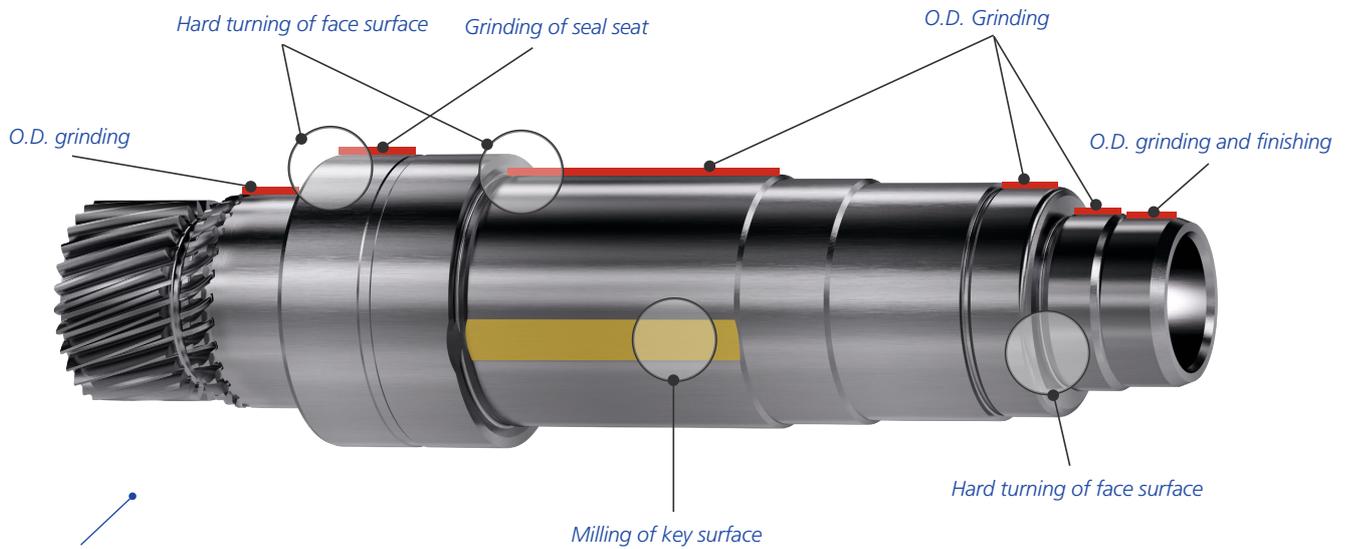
Hard-fine machining processes carried out on different surfaces of the hollow shaft
